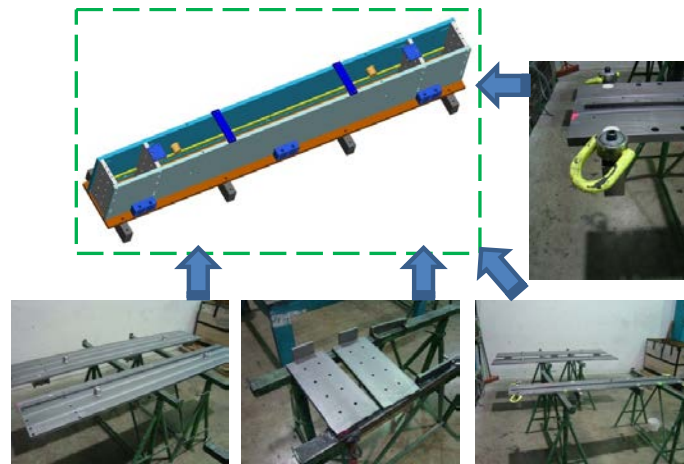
PSI girder, b) Supporting structure for milling machine, c) Girder for cutting-tool distributor machine.
